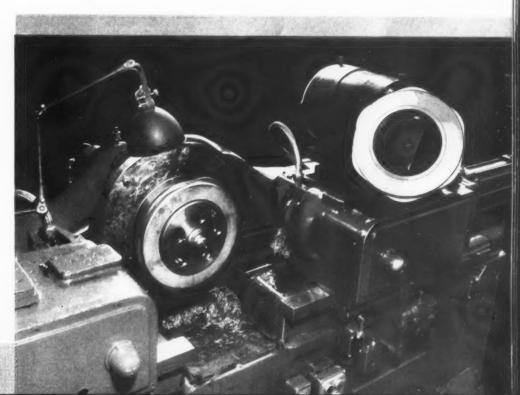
Interchangeable Heads are Used for Drilling, Countersinking, and Tapping Intake and Exhaust Port Flanges on Various Types of Cylinder Heads
